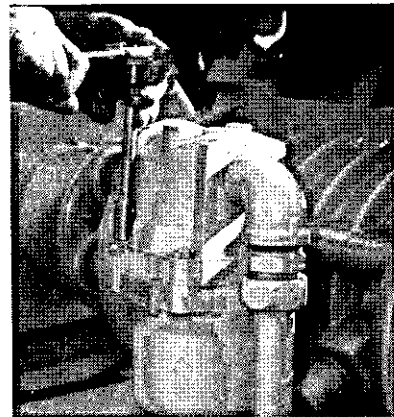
Compressor oil filter (sheet 1 of 2)
